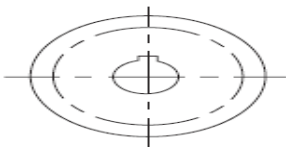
Examples To Basic Welding Symbol To Shaft Support
